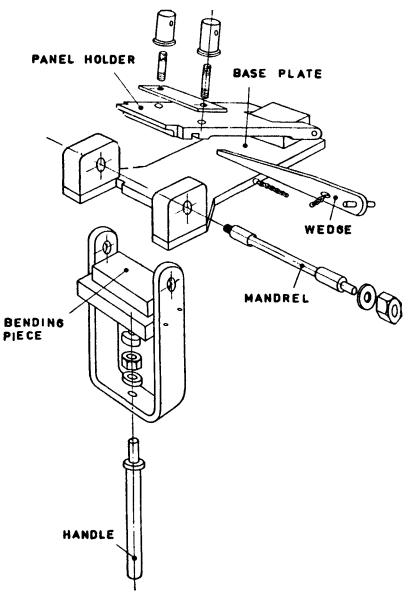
DETAILS OF TYPE 2 BEND TEST APPARATUS
